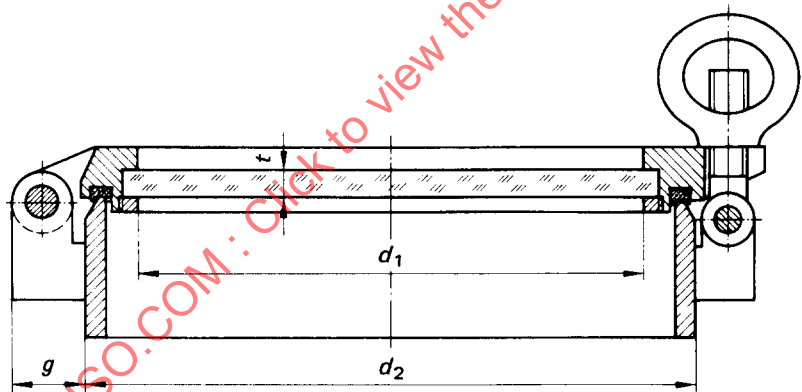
Opening side scuttle without deadlight, welded
